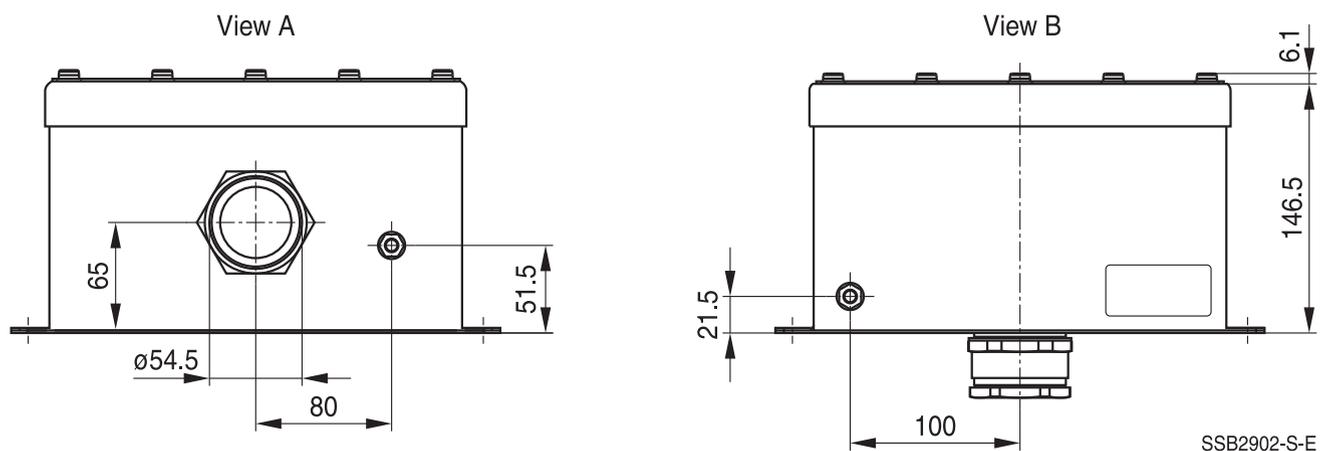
B84299D1101E303 (4 × 100 A) – details of connection
